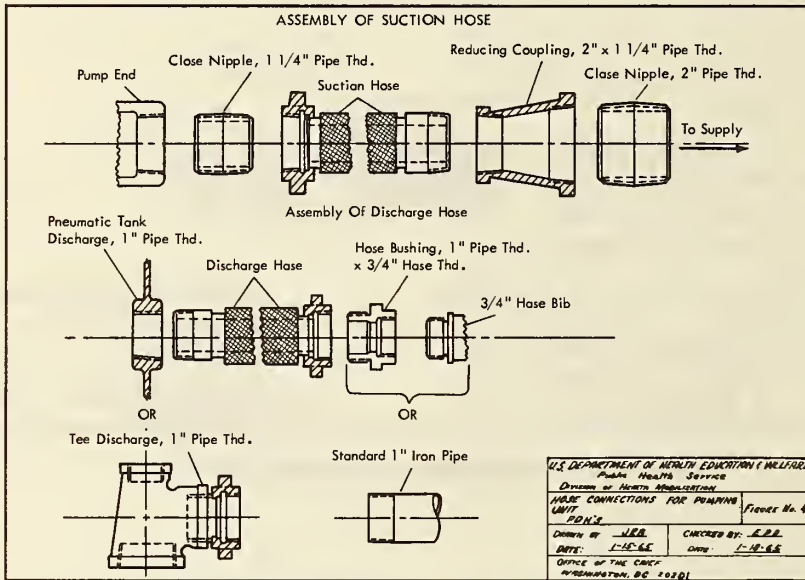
ASSEMBLY OF SUCTION HOSE
